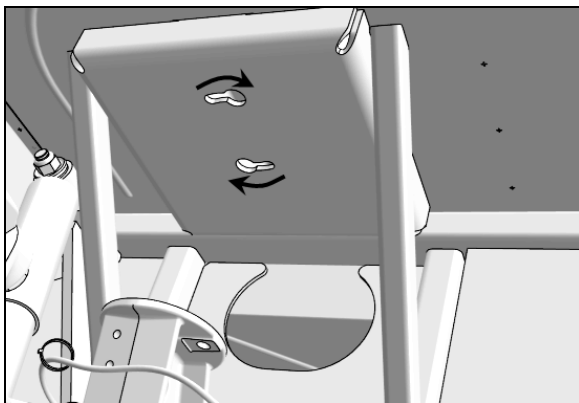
AIR SPRING UPPER MOUNTING PLATE
